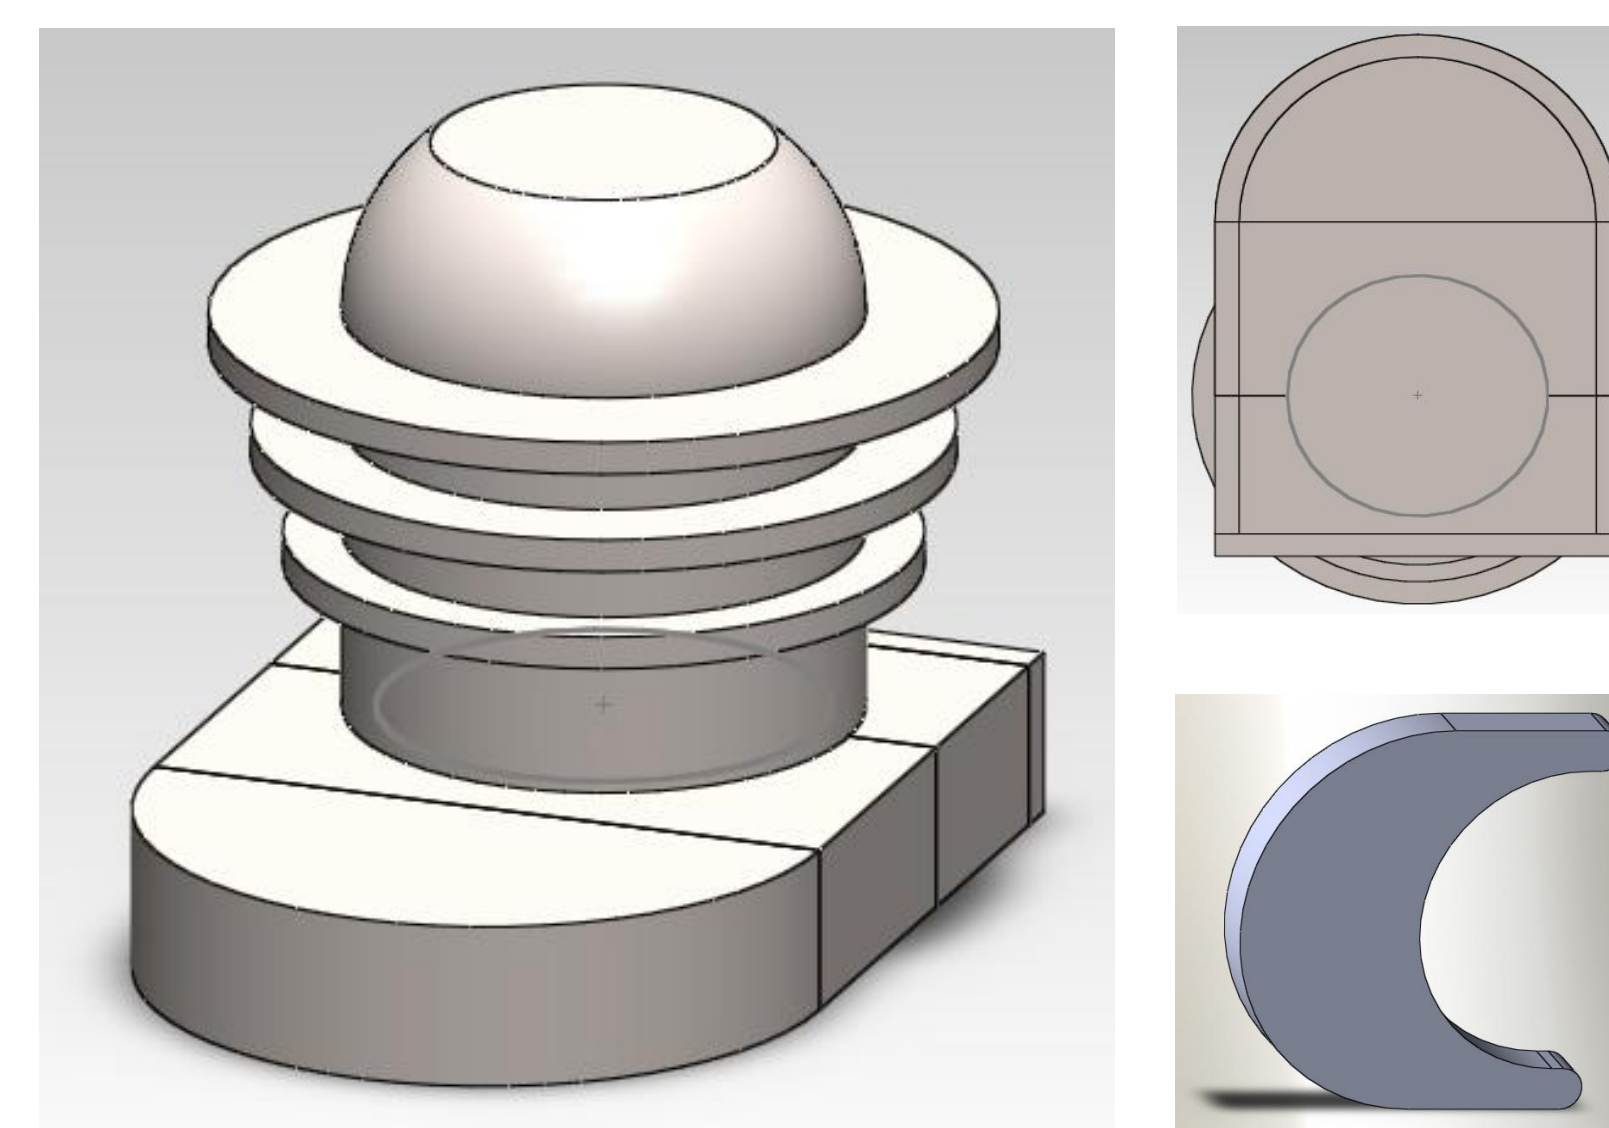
(Left) Isometric view of final design. (Top Right) Bottom view looking into housing of final design without cover piece. (Bottom Right) Sliding device for final design.
